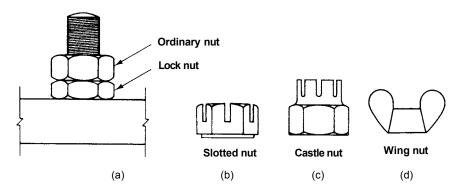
Types of nuts: (a) Locknut; (b) Slotted nut; (c) Castle nut; (d) Wing nut
